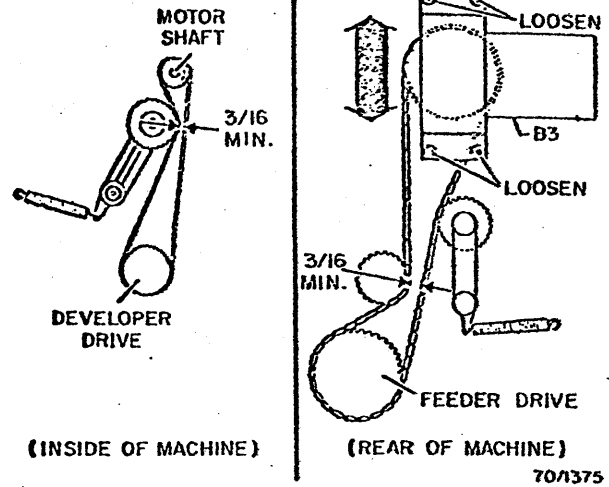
Developer/Paper Feeder Drive Motor Adjustment
